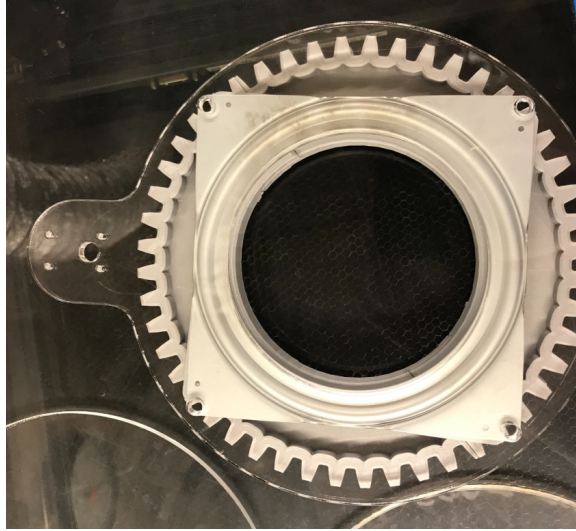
Motor mounting plate, lazy Susan, and gear assembly.
